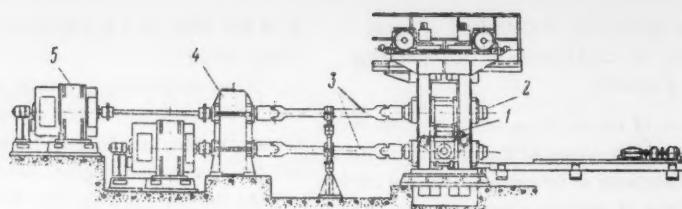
Four-high reversing mill with driving back-up rolls: 1) working rolls; 2) back-up rolls; 3) spindles; 4) gears; 5) electric motor of the mill.
